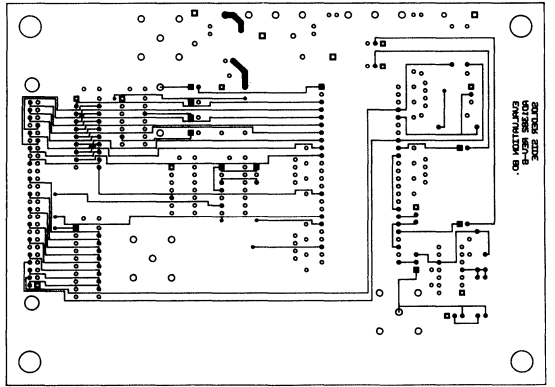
AD1382 Evaluation Board Layout, Layer 4 (Solder Side)
